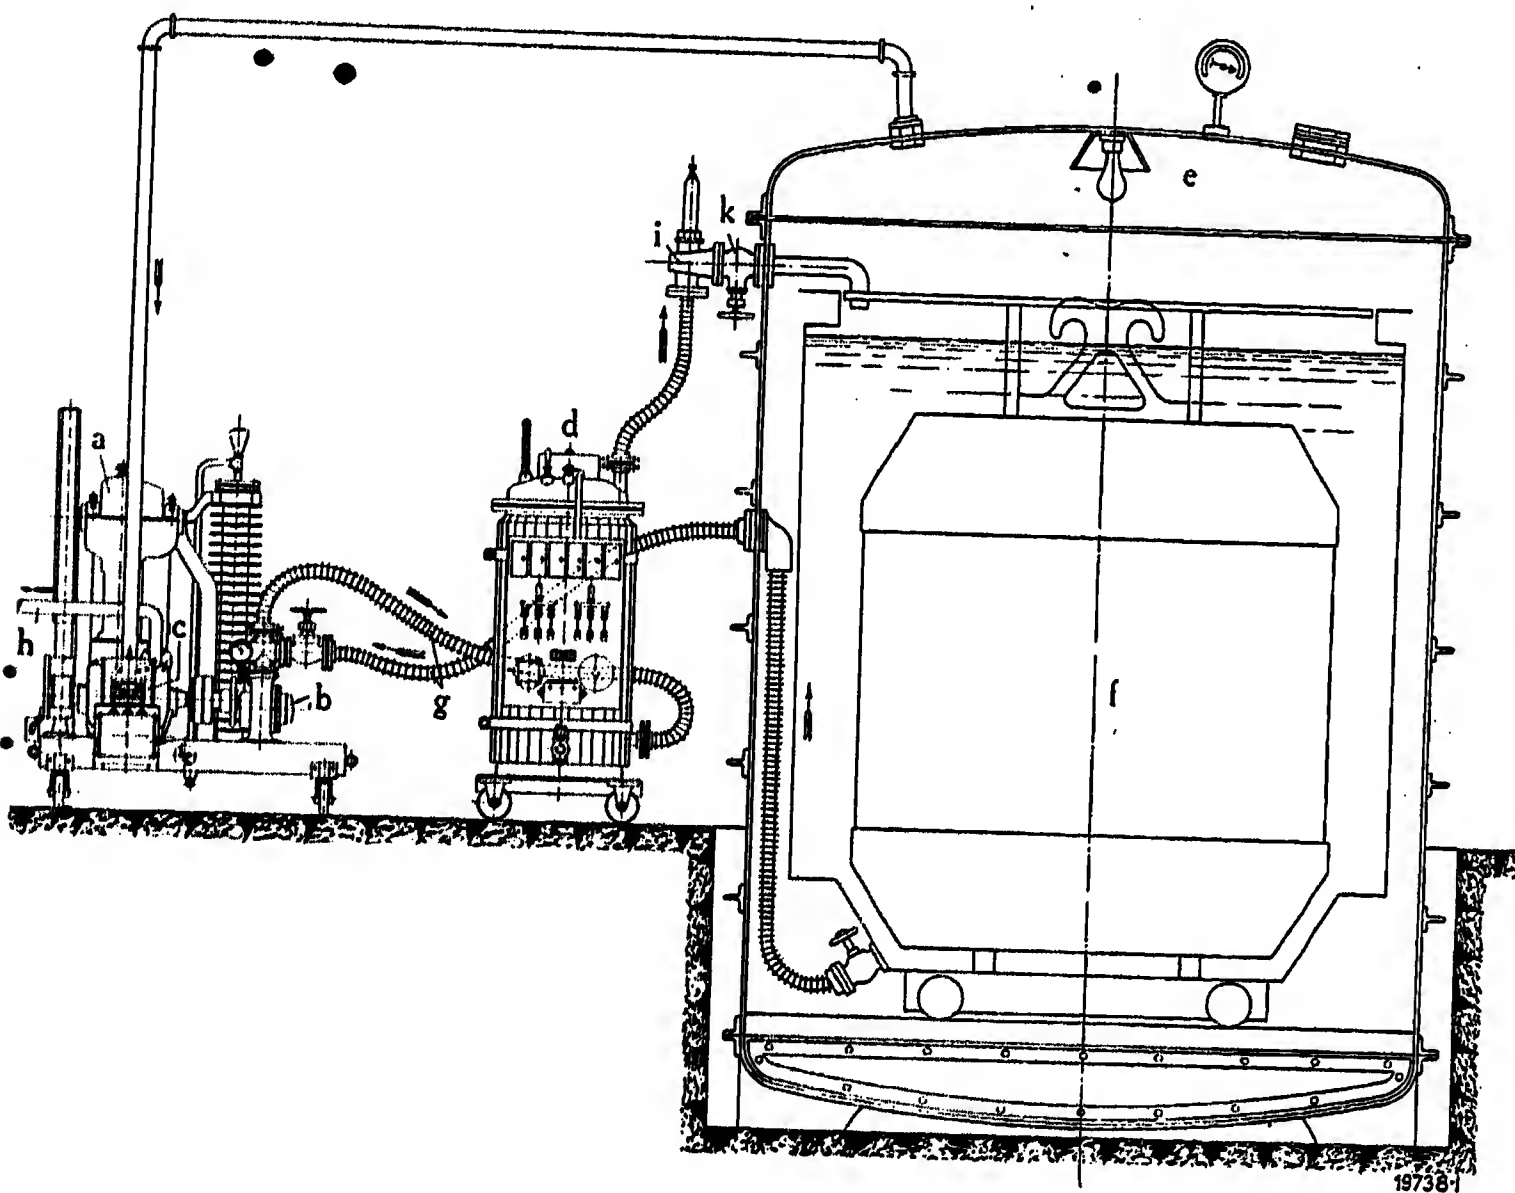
Vacuum oil-drying equipment and vacuum tank.
